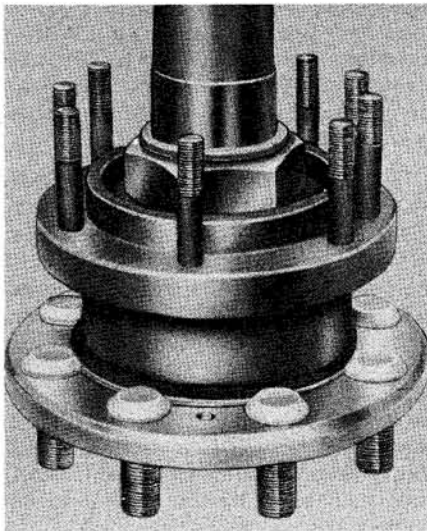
A — View showing self-locking nut that is used to retain rear axle bearing on late production tractors. Always renew self-locking nut when reassembling axle unit.
